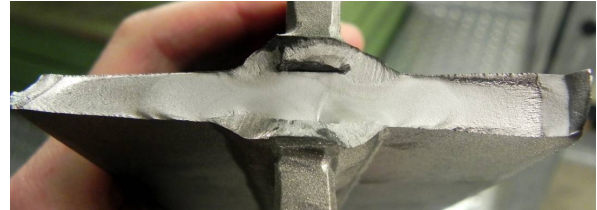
Crack initiation on shot peened joints (weld root)
